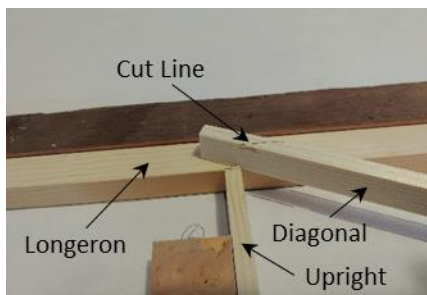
shows the completed cut line. Remember to cut such that you leave the line on the diagonal.
